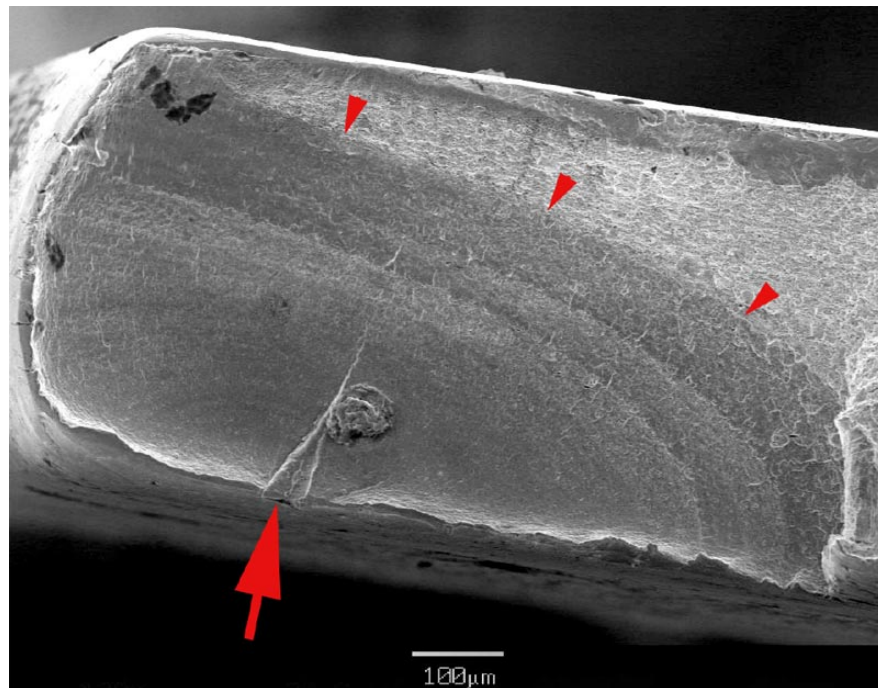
Fatigue Fracture Surface [55]
